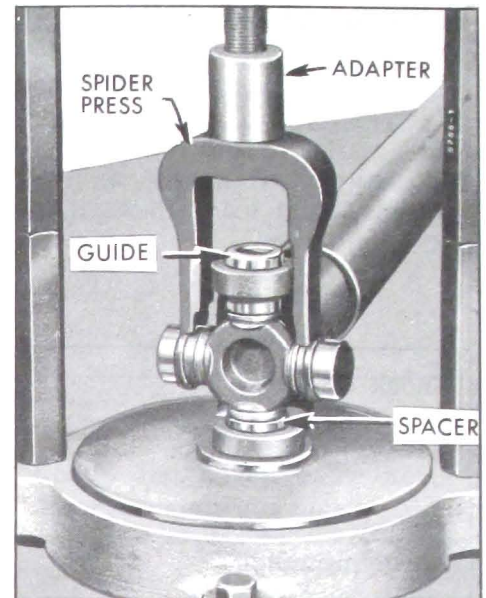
Removing Bearing With Guide and Spacer in Place
